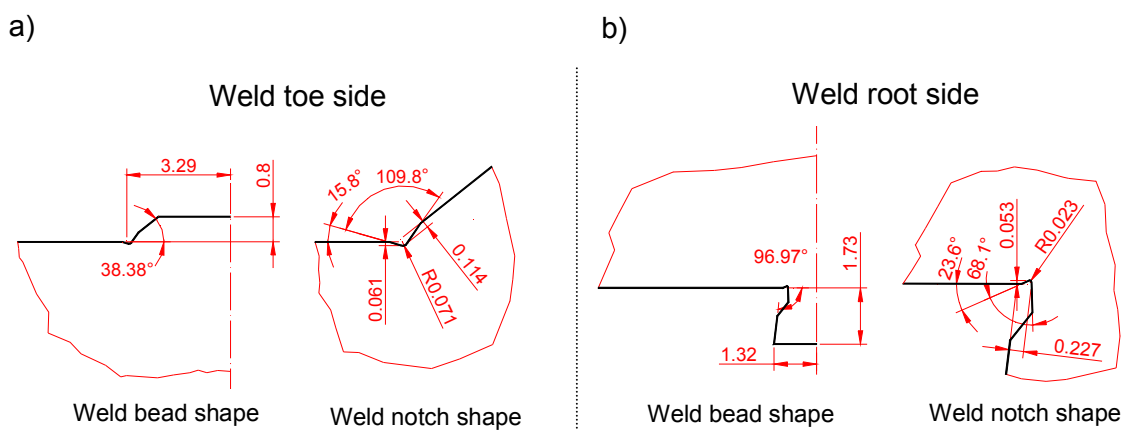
Geometry of the weld bead and notch for the weld toe (left) and the root (right) sides.
